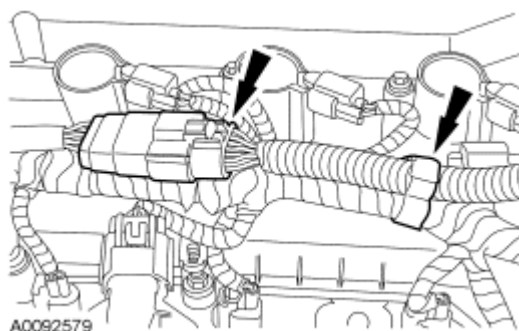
Locating Fuel Charging Wiring Harness Electrical Connector And Harness Retainer
